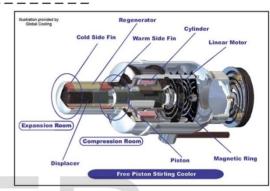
Free Piston Stirling cooler (cut-section) [i]
